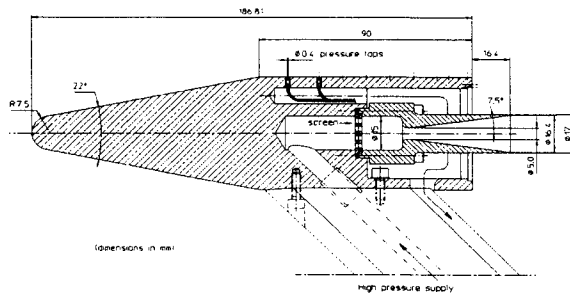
Blunt cone-cylinder configuration showing exhaust nozzle and construction details.
